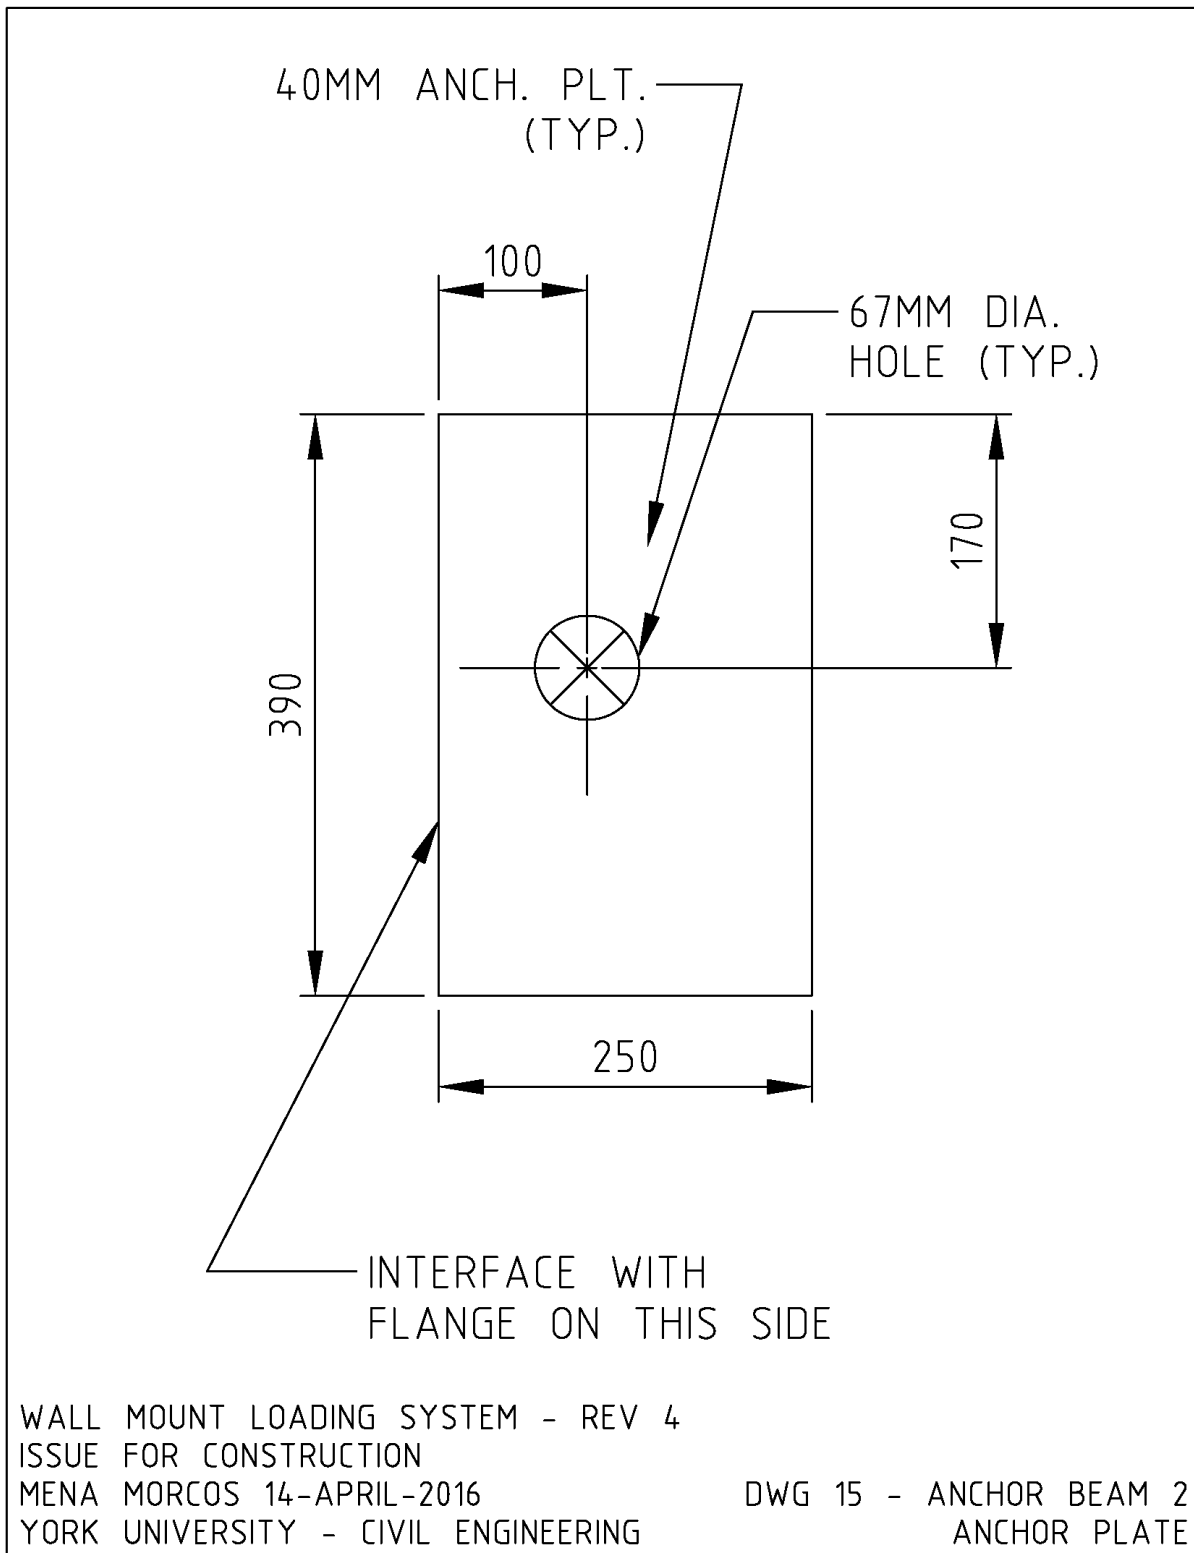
Wall mount loading system design and fabrication drawing – Drawing 15.
